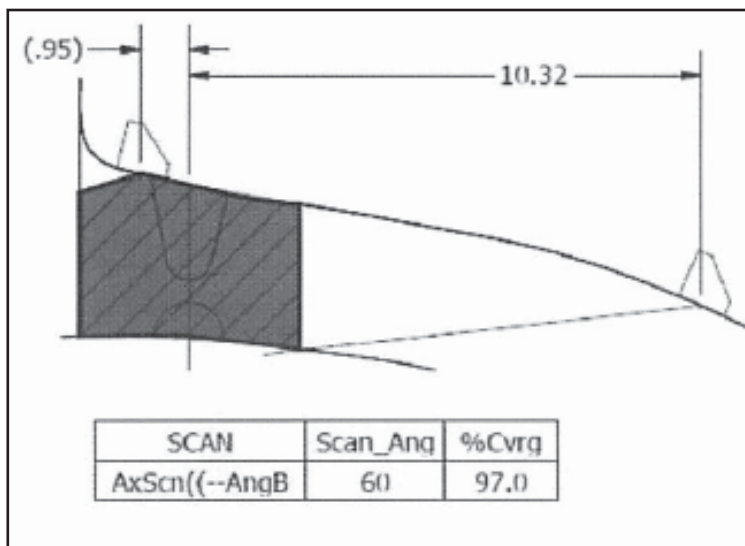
Weld RCW-15, 60° Nozzle Side Axial Scans
